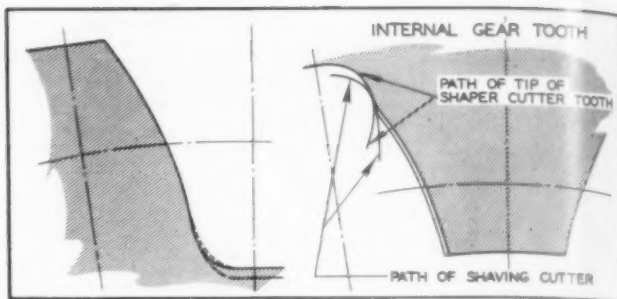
(left) is a gear tooth form generated by both a shaper cutter and hob having the same addendum. Fig. 10 shows the results when a protuberance shaper cutter is used to cut internal gear teeth which are to be shaved later. The outline of the tooth as shaper cut is shown by tracing the extreme edge of the tooth form.
